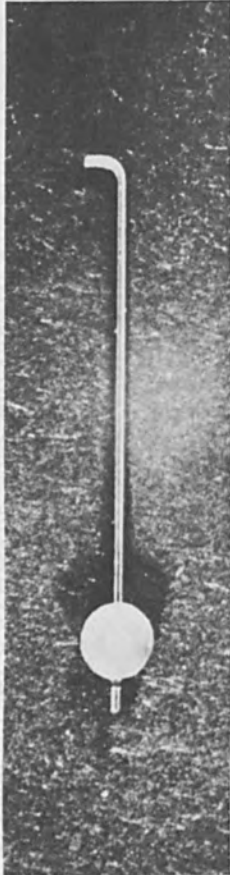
Mild-steel nugget beam-welded to a 0.022-in. diam. stainless-steel wire.
